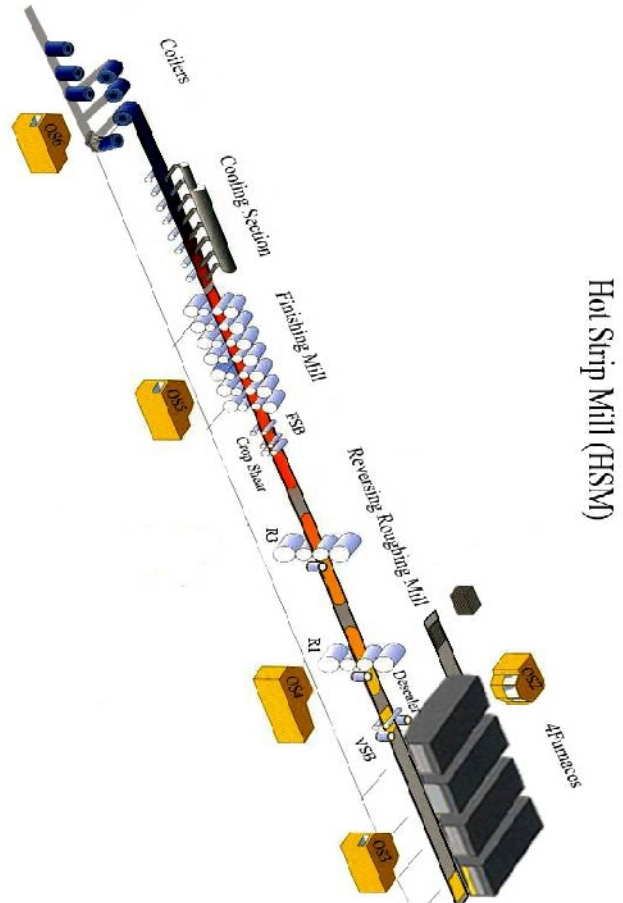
Hot strip mill line schematic of Mobarakeh Steel Company.
